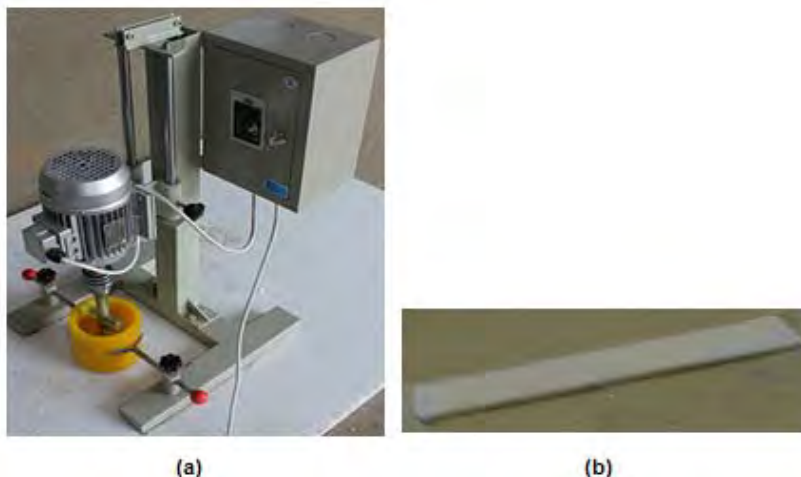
(a) Stir casting machine and (b) cast tensile specimen
